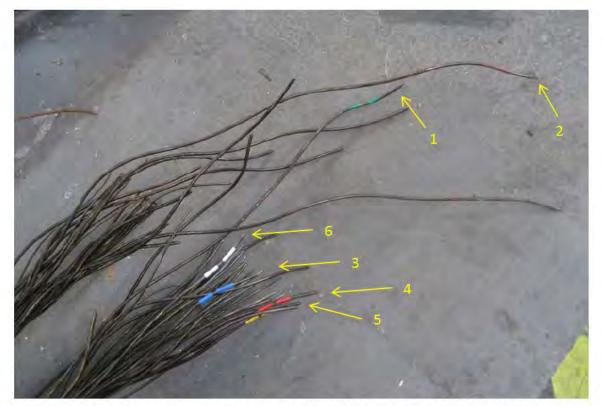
Tug side sample main failure Locations and ID numbers of wire fracture surfaces taken for further examination.
